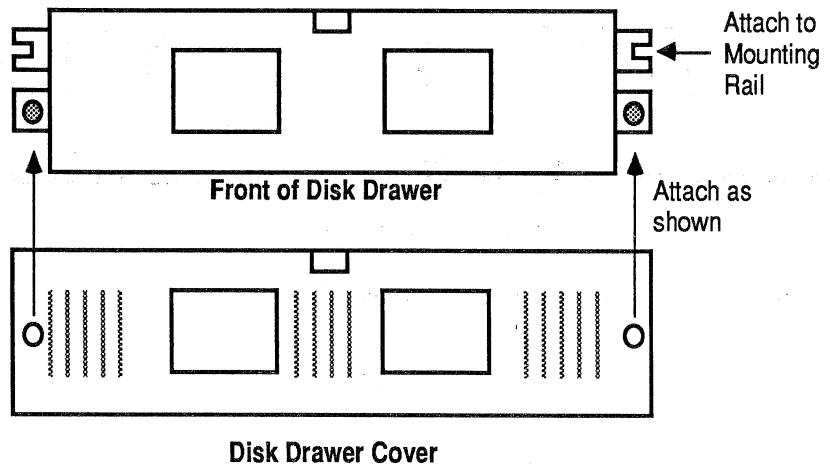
Front of 8-Inch SMD Disk Drawer
